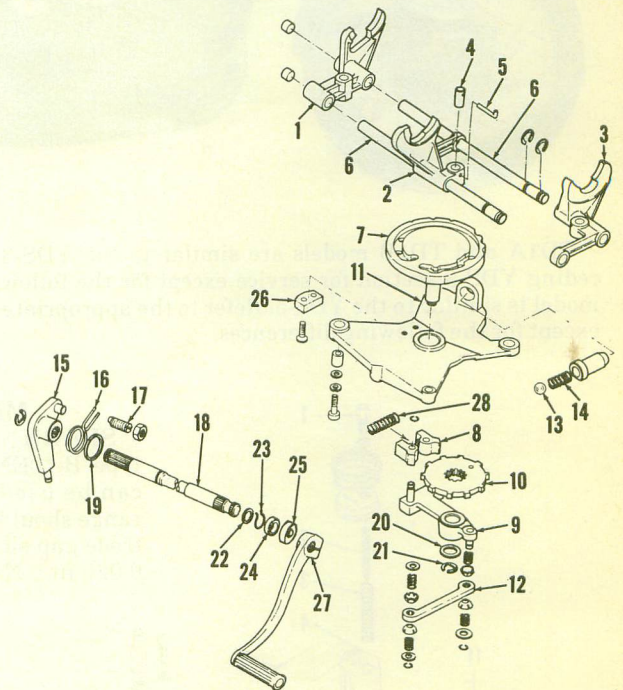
Cross sectional view of the shift assembly. Refer to Fig. Y5-25 for legend.
